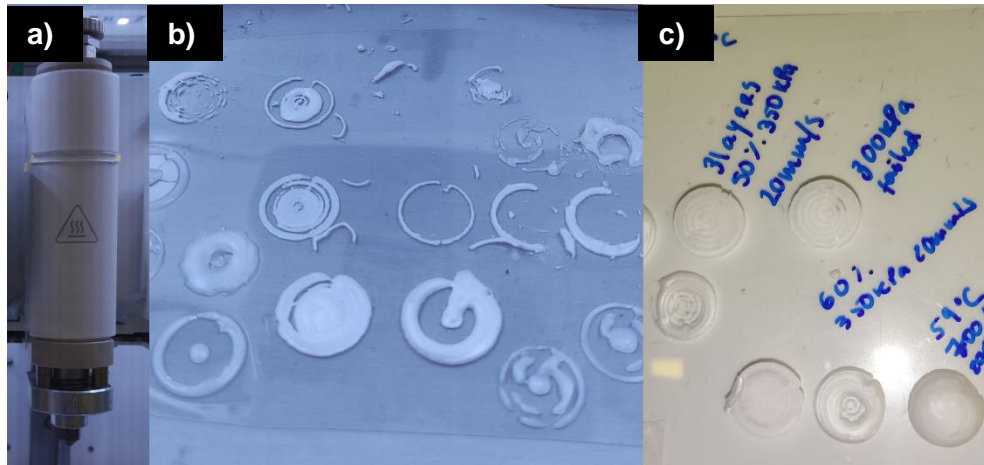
a) Thermoplastic printhead, b) initial printing attempts, c) possible prints with this set-up showing top and bottom of printed tablets
